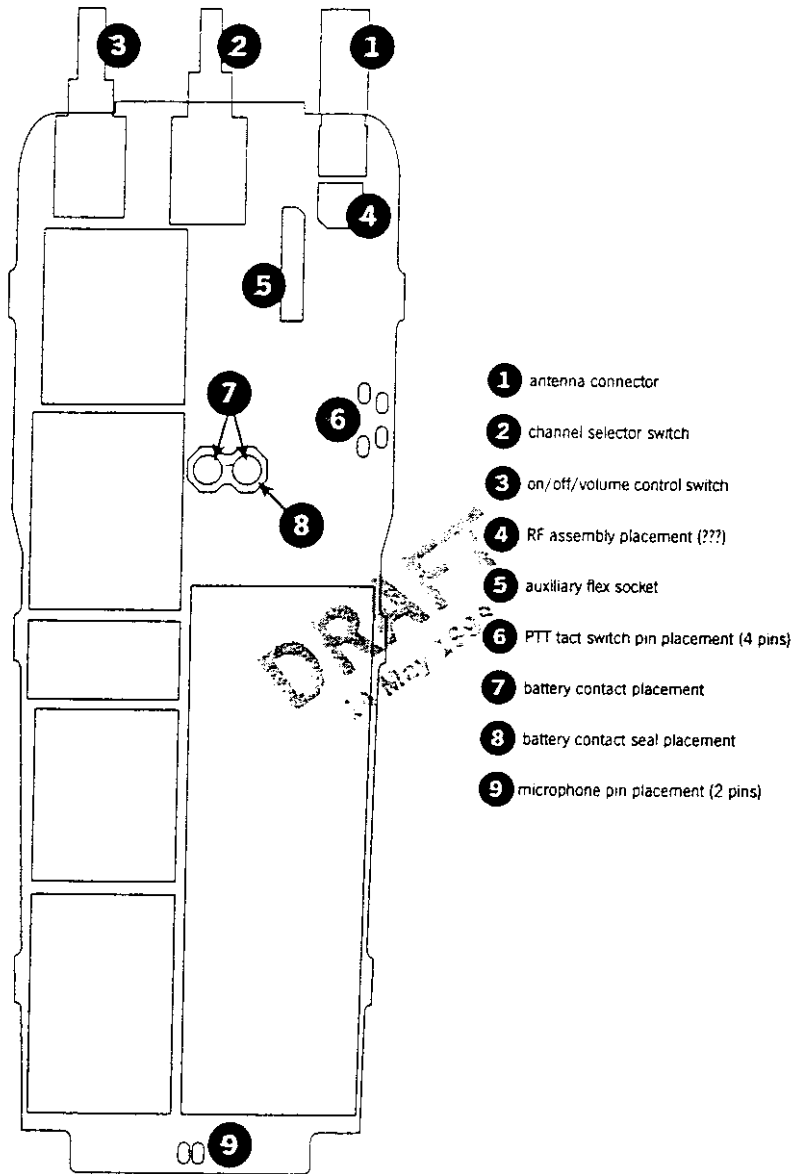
Top surface of PCB, which is visible only when the PCB has been removed from the chassis
